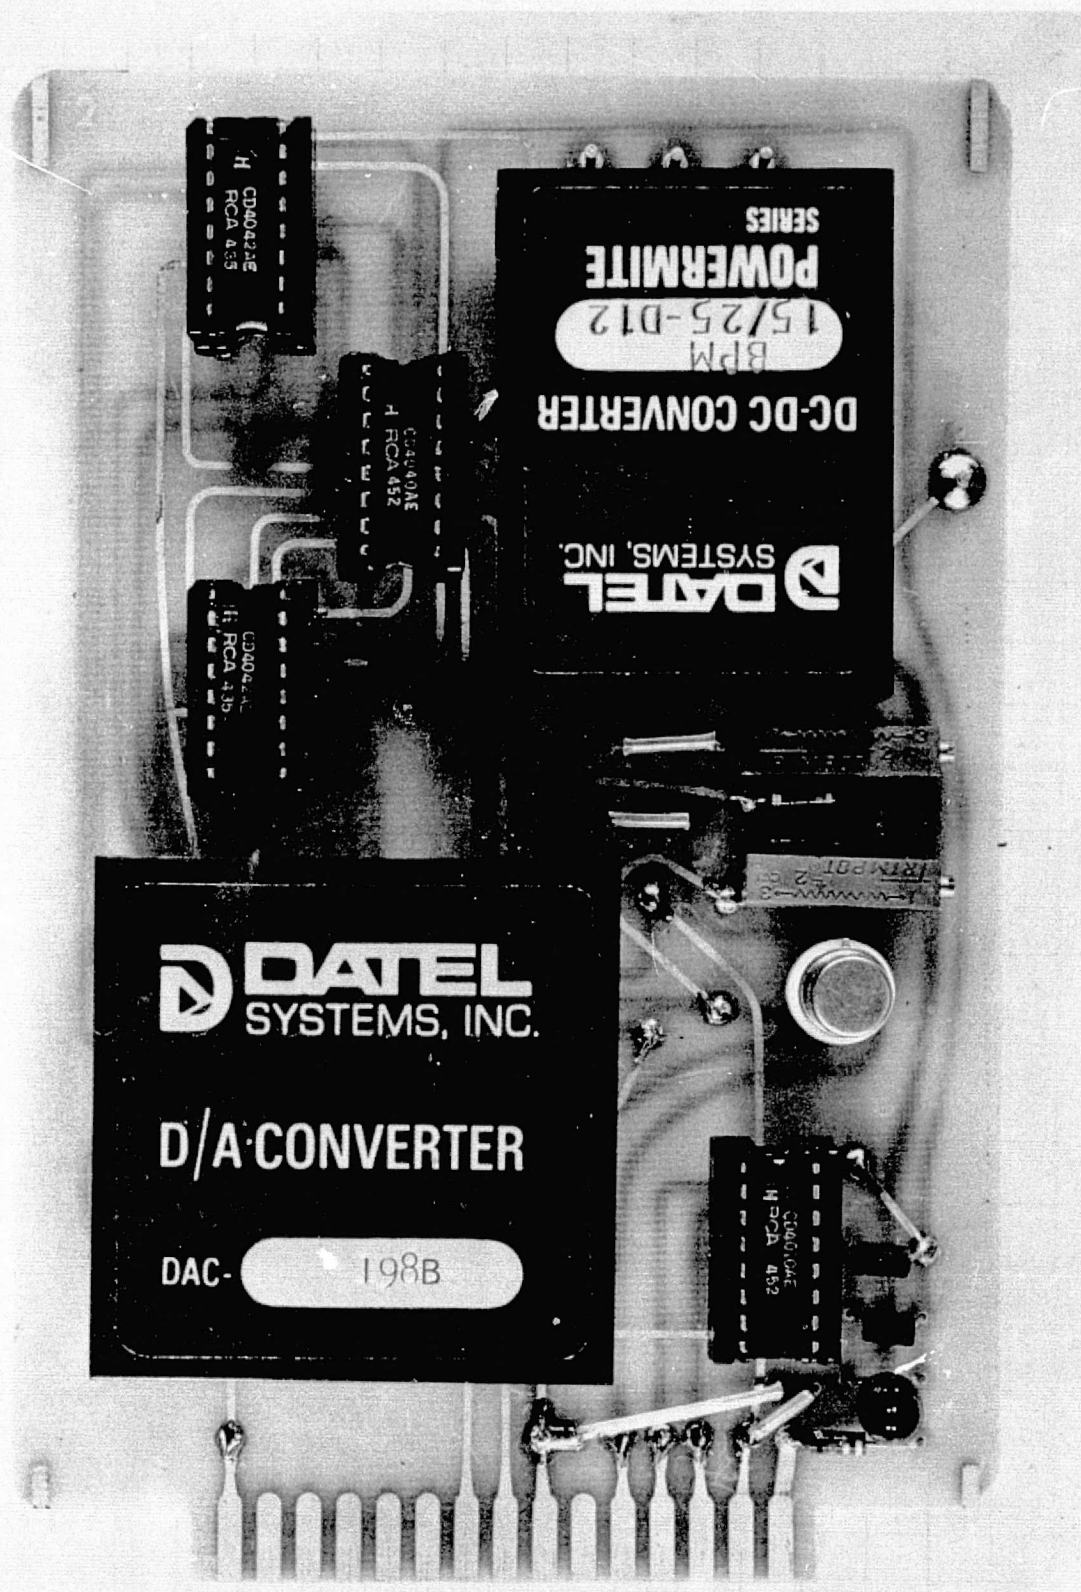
PRINTED CIRCUIT CARD 2
